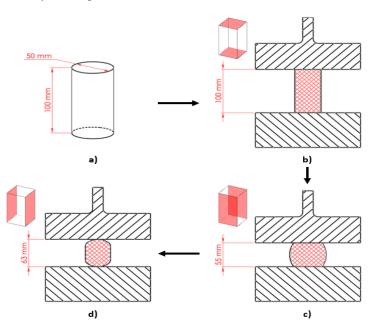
Schematic forging steps: a) initial dimensions of the samples, \mathbf{b}) – \mathbf{d}) forging in different axes.
